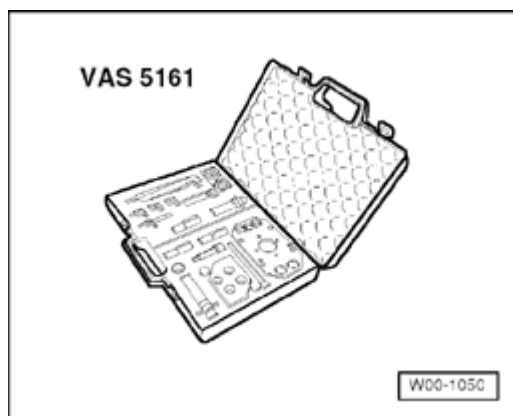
Valve Cotter Disassembly/Assembly Device VAS 5161
